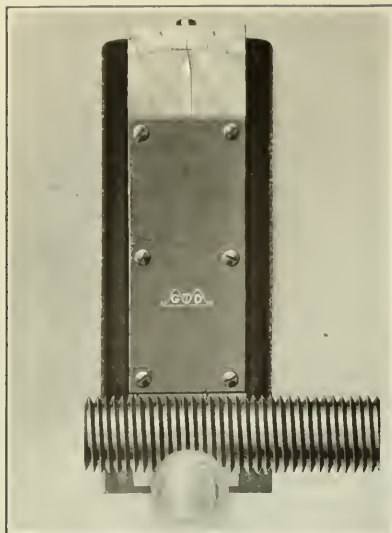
Indicator shown in Fig. 18 in Use testing Lead of Screw
